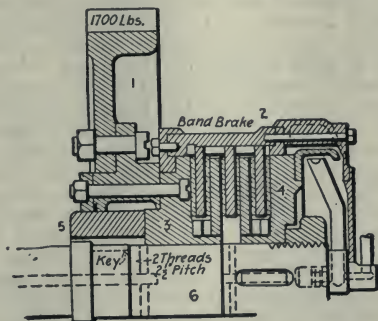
Sellers Type Disc Friction Brake for Boat Crane
